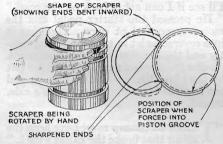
A carbon scraper fashioned from an old piston ring makes an ideal tool to remove the carbon from the ring grooves in the piston
